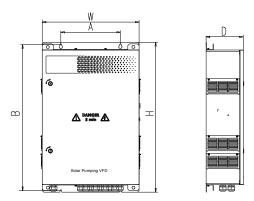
IP54 VFD dimensional drawing IP54 VFD dimensions (unit: mm)
